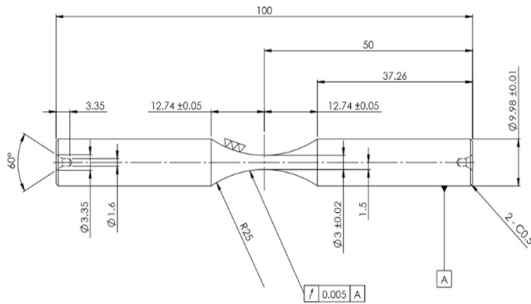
Shape and dimension of specimen for rotary bending fatigue test
